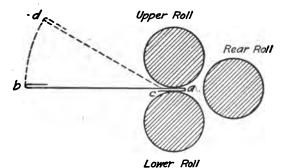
Inserting the Sheet Between the Rolls of a Forming
